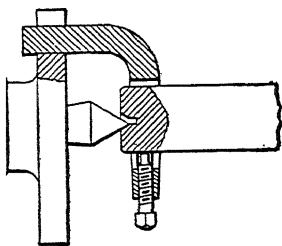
When using a dog larger than necessary it is liable to bind on the sides of the faceplate slot, and may also bind on the bottom. In either case the work will not fit on the lathe center and will not run true.
